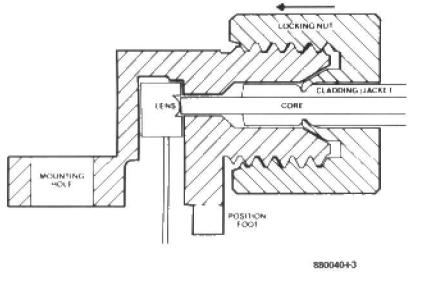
Cross-sectional view of the Motorola fibre optic connection system.
